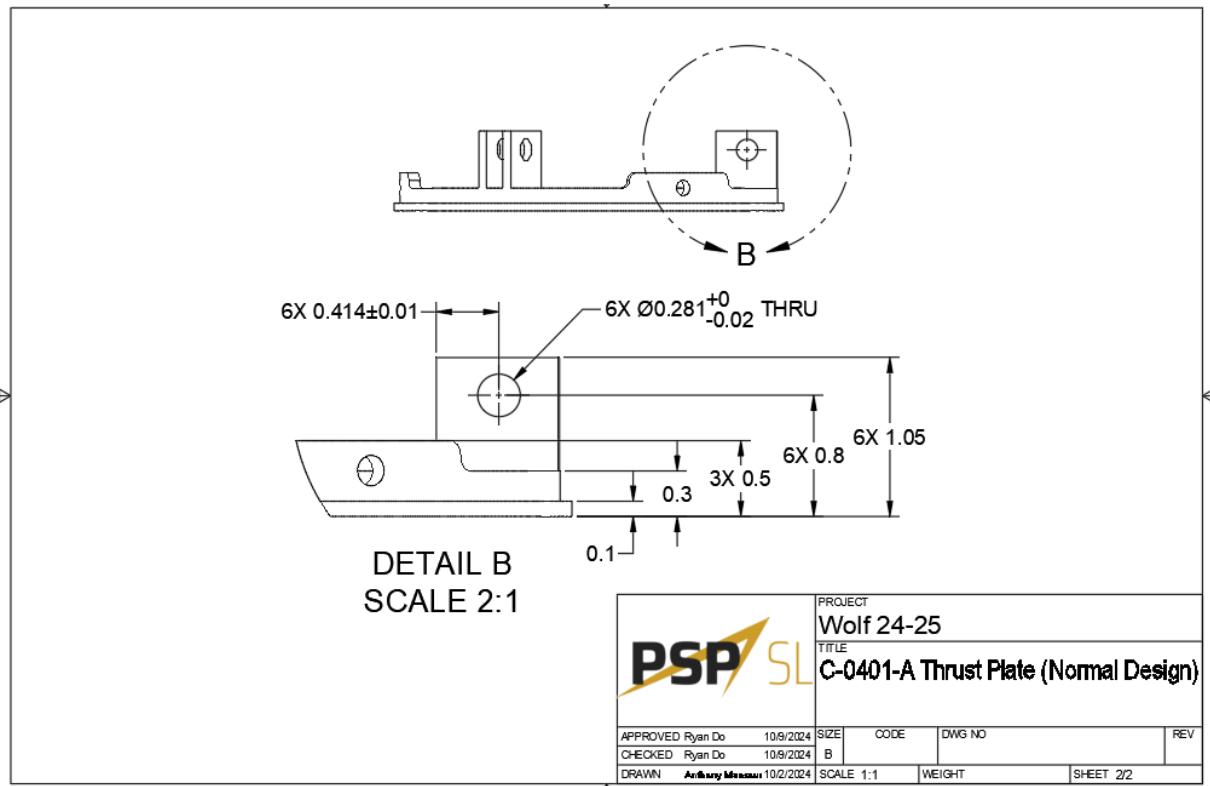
Thrust Plate Technical Drawing (Sheet 2)
